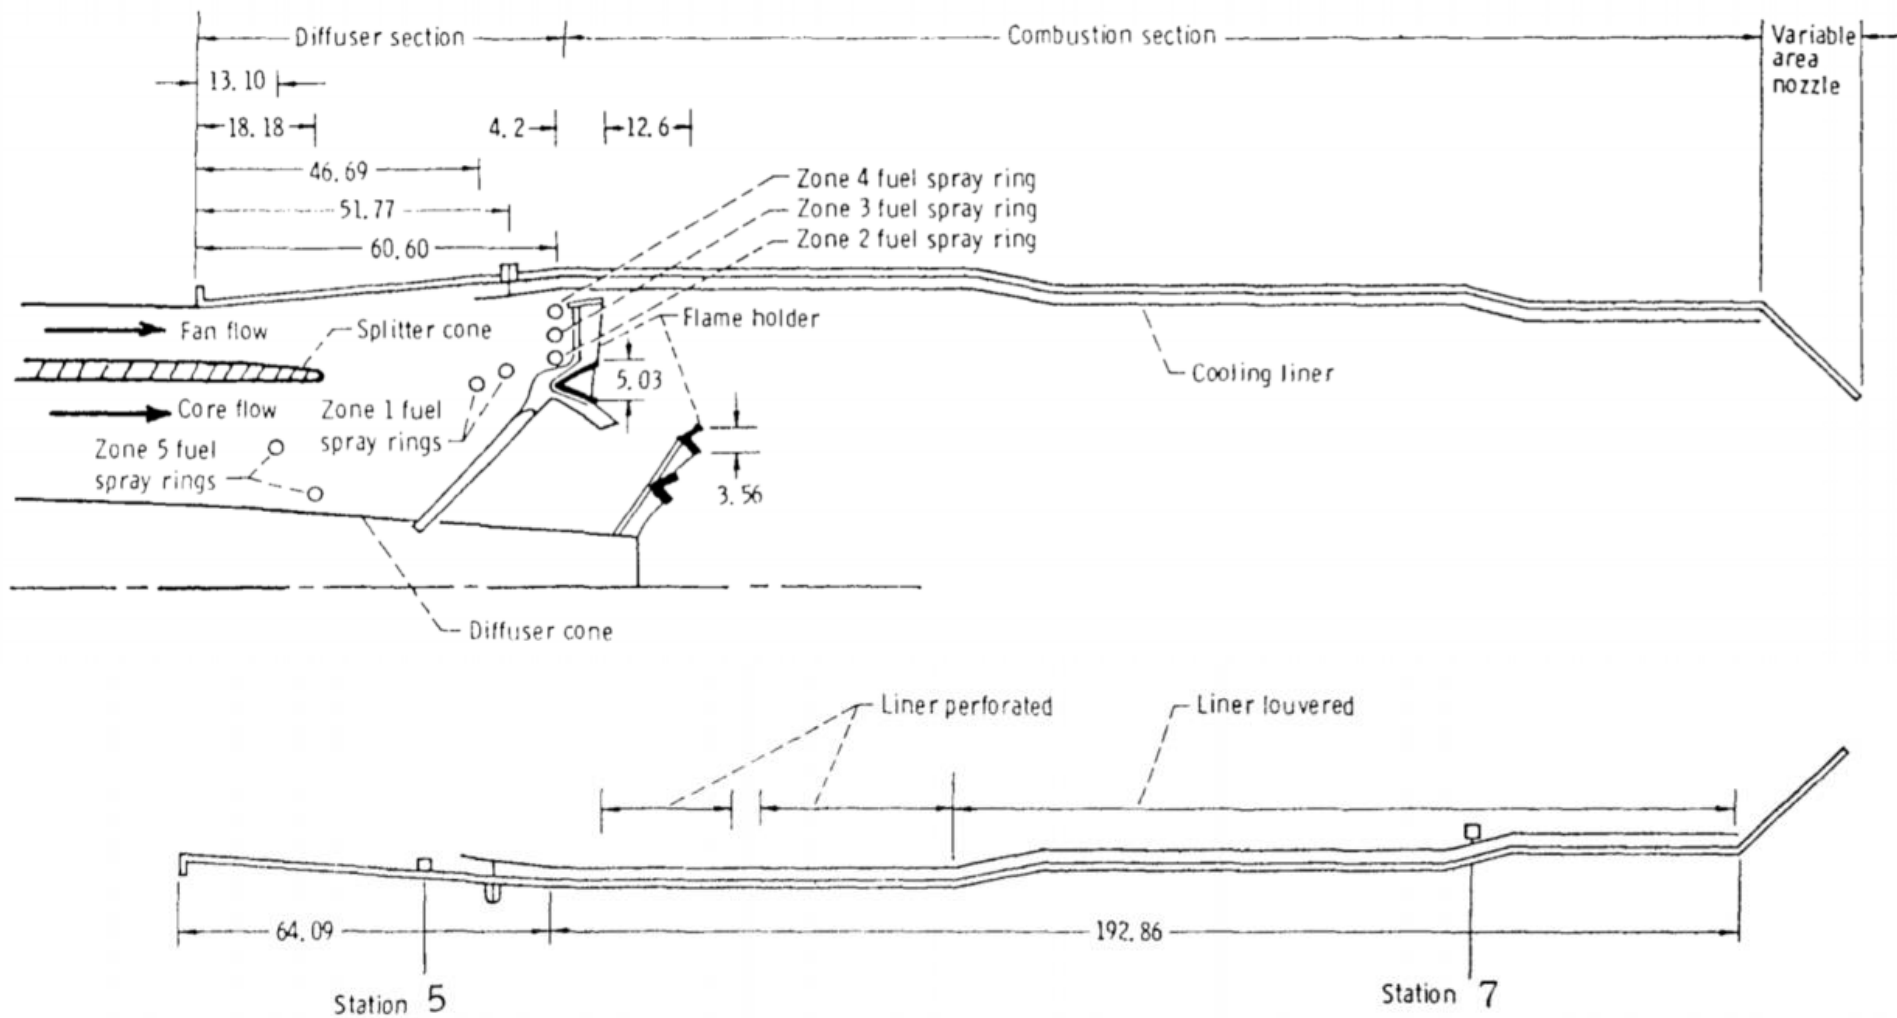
Afterburner for TF30-P-3 augmented turbofan engine [all dimensions are in centimeters (from Ref. 29)].
